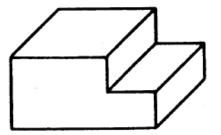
PARALLELISM BETWEEN MILLED SURFACES
